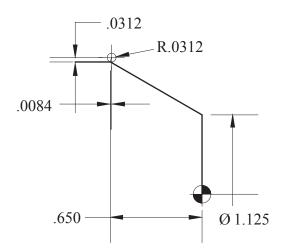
Answer for Calculate Tool Nose Radius Offset Coordinates
